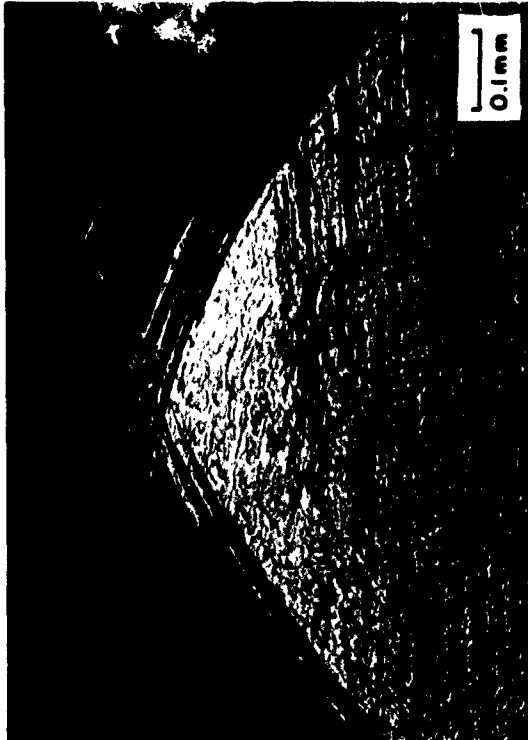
Enlarged view of transition from mirror area to Wallner lines on fracture surface at left.
